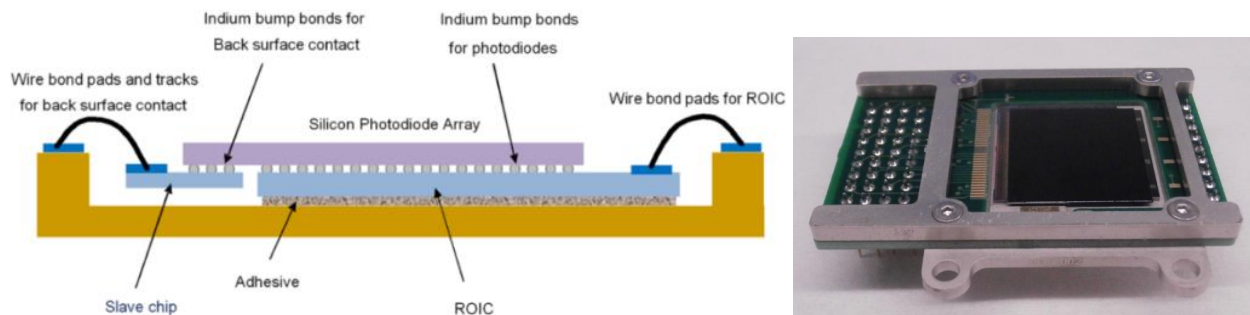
Left: Hybrid CIS assembly. Right: Packaged hybrid CIS
